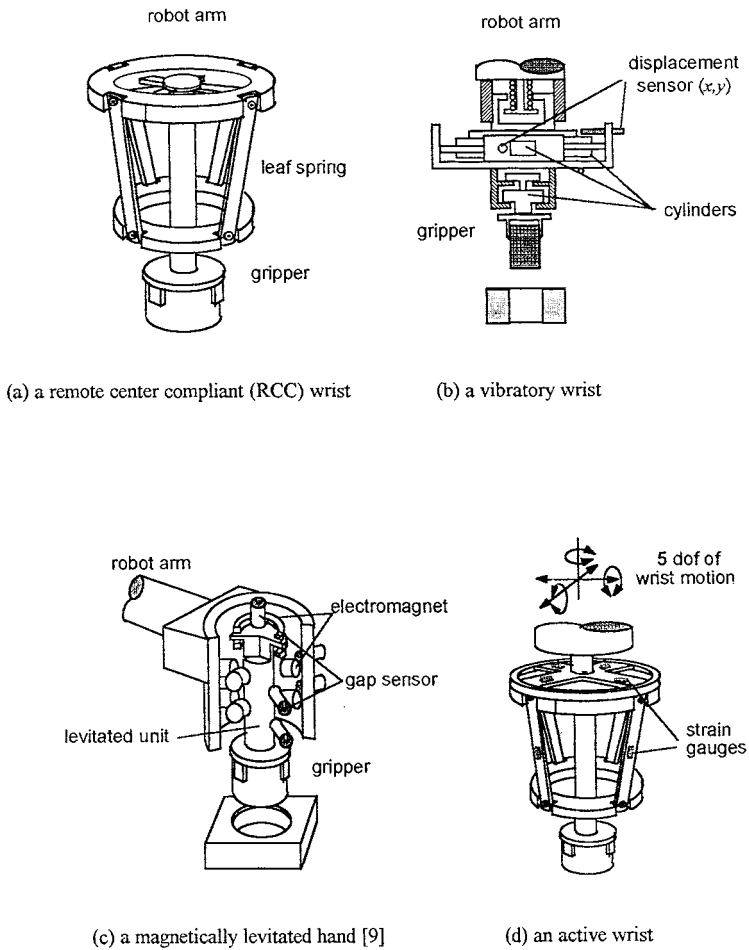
Various assembly wrists. (Courtesy of S. H. Cho.)
